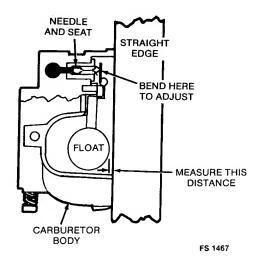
CARBURETOR TYPE A ADJUSTMENTS
